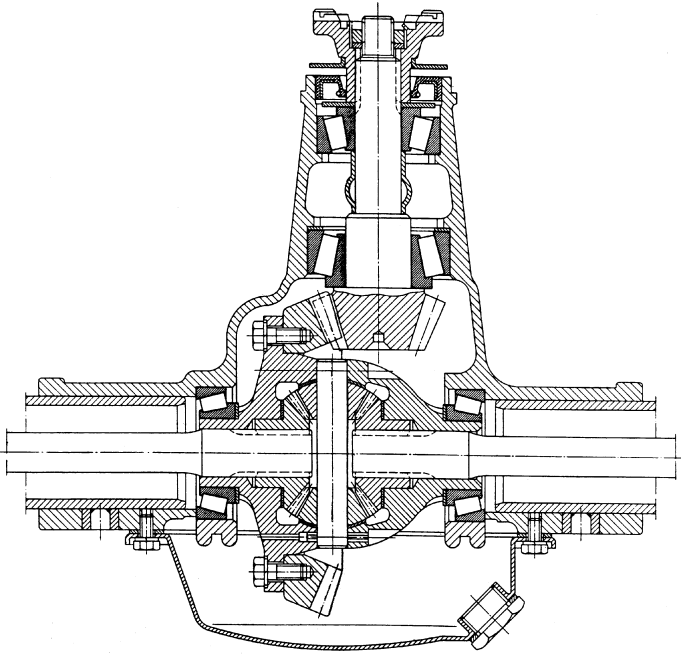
Passenger car differential gear (with permission of FAG OEM and Handel AG).
